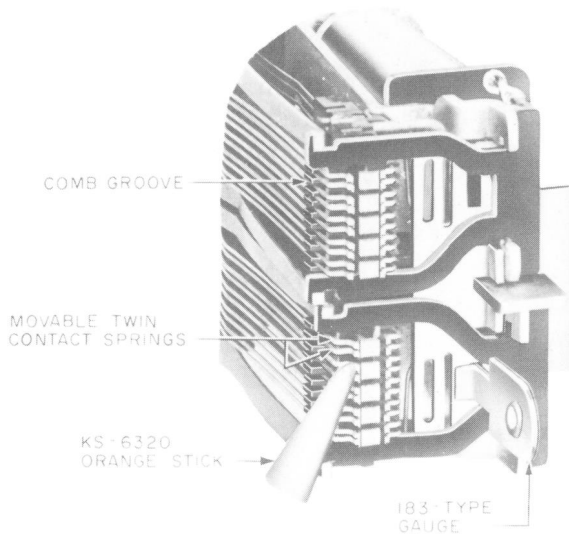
Method of Checking Open or Closed Contacts of AM-Type Relay
